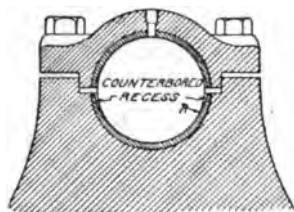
SEC. 7a.—Oil grooving and counterbored recess of outboard bearing.
